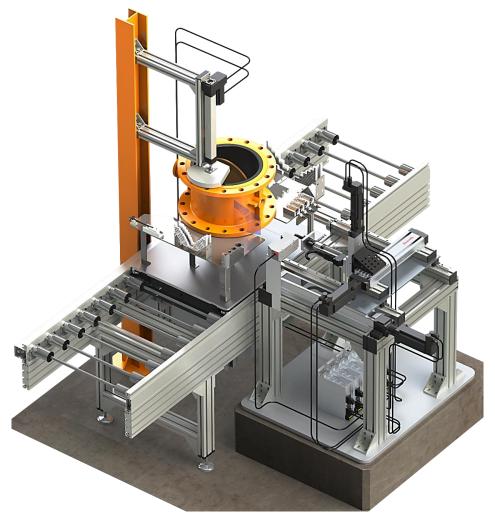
Visual representation of the designed assembly station for fastening different sizes of the threaded plug with sealing ring.
